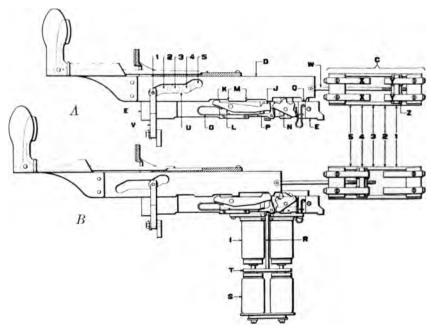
Switch Lever, Electric Interlocking Machine Unit Type, General Railway Signal Co.
